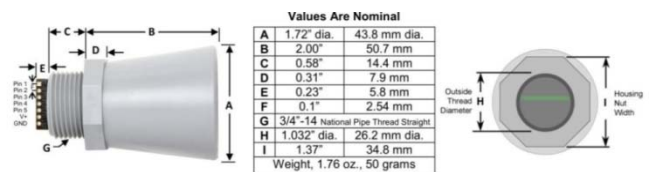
HRXL-MaxSonar®-WRS™ Mechanical Dimensions
